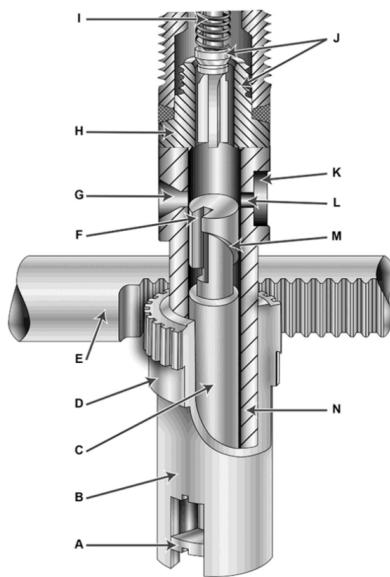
7-10.-Bosch injection pump and control rack assembly
